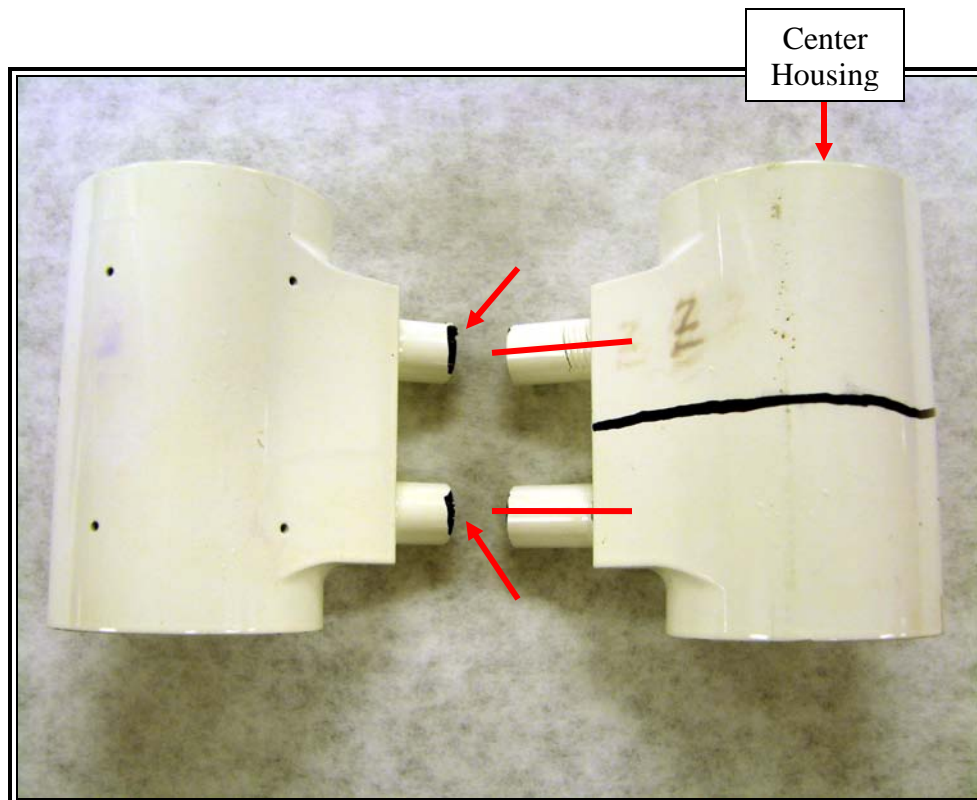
Photograph showing sectioned locations to open the fracture surface (arrows)
